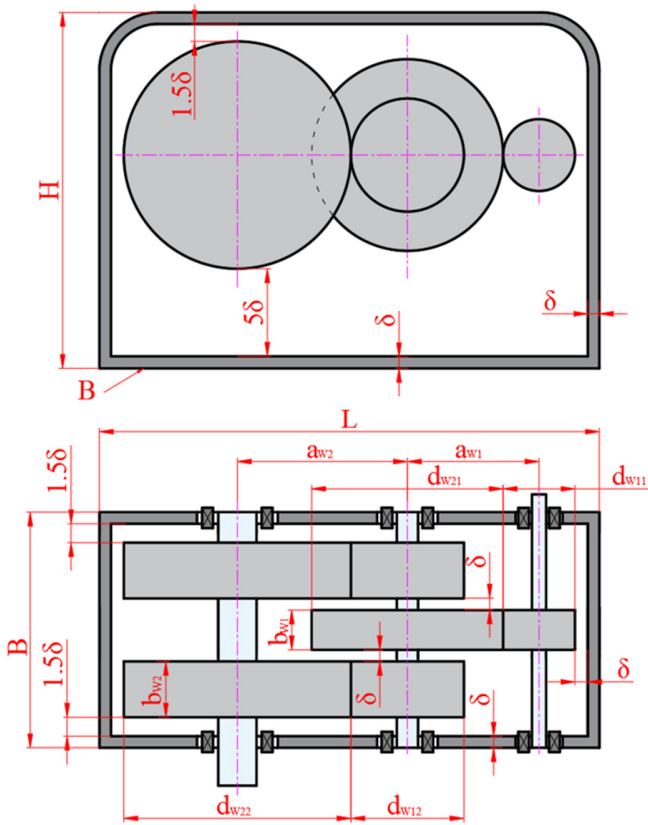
Dimensions of the two-stage helical gearbox with dual gears.
